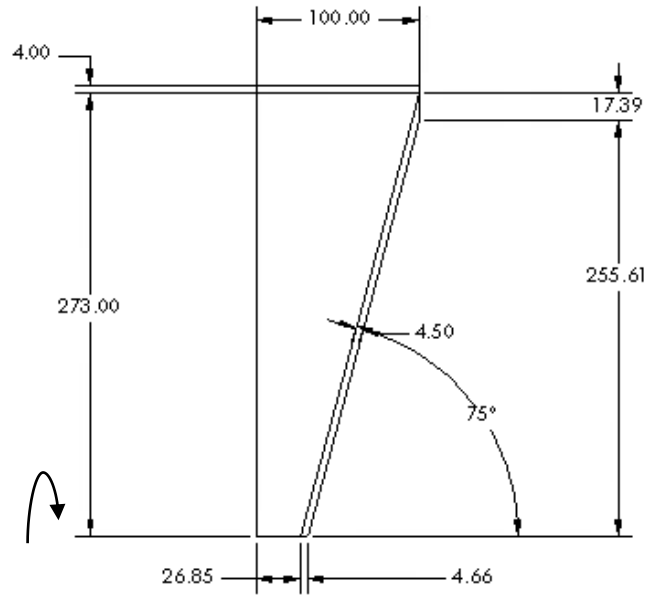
2D Drawing of 28.86 kg TNT Shaped Charge (Dimensions are in mm).
